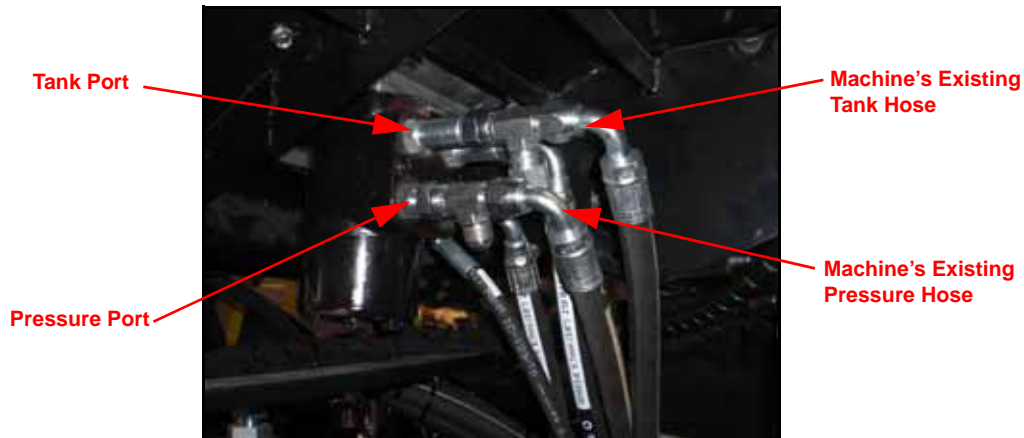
Steering Hoses Installed on the SmarTrax Valve
